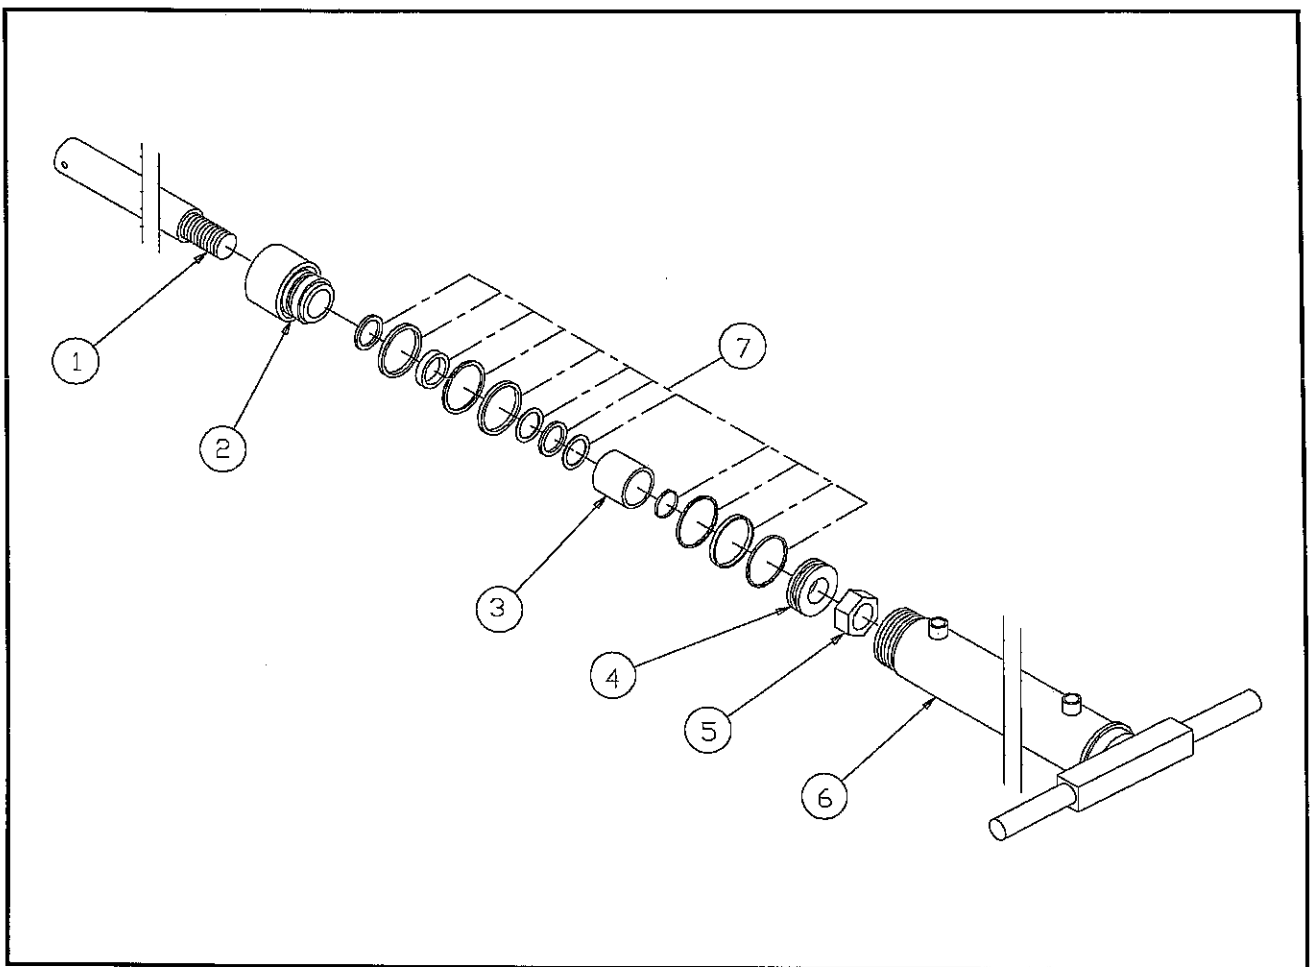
UNDERCARRIAGE SLIDE CYLINDER
